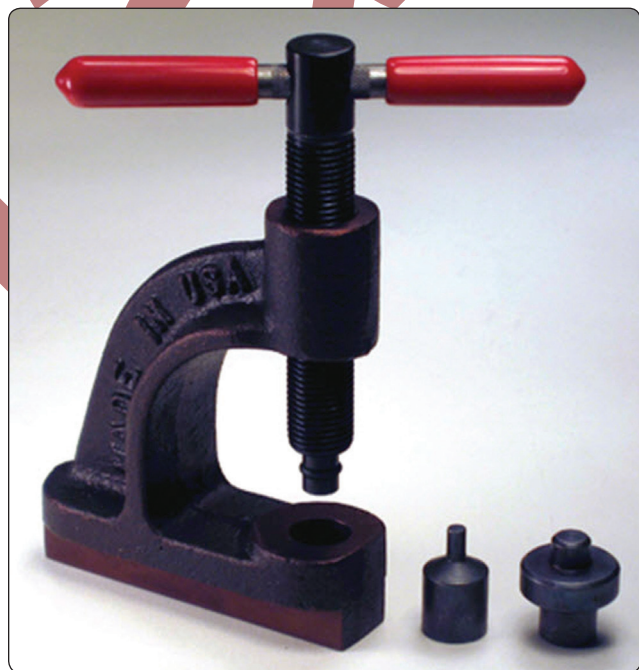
Rivet setting tool is used to install brake linings on Cleveland brake pressure plates and back plates.
